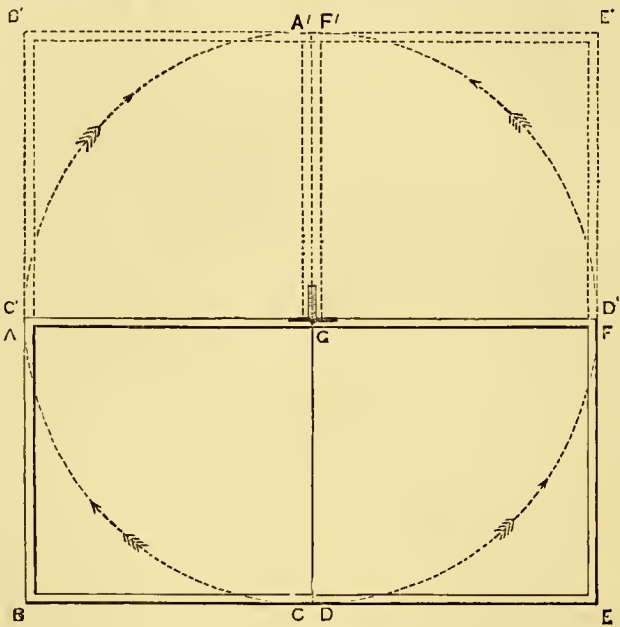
FIG. I.—PLAN OF DOLL'S HOUSE, SHOWING IT WHEN CLOSED AND WHEN OPEN.
